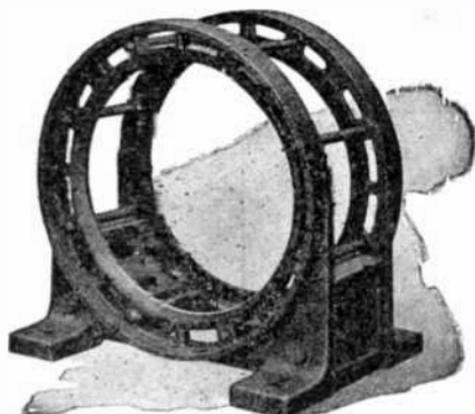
,558.—Allis Chalmers skeleton cast steel frame for type A.R. motor showing saddle blocks.
